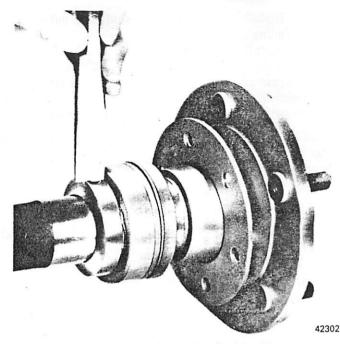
F-25 Notching Bearing Retaining Ring-Cherokee-Wagoneer-J-10 Truck Axie
